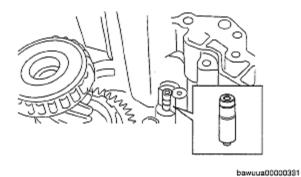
Identifying Parking Pin Courtesy of MAZDA MOTORS CORP.
